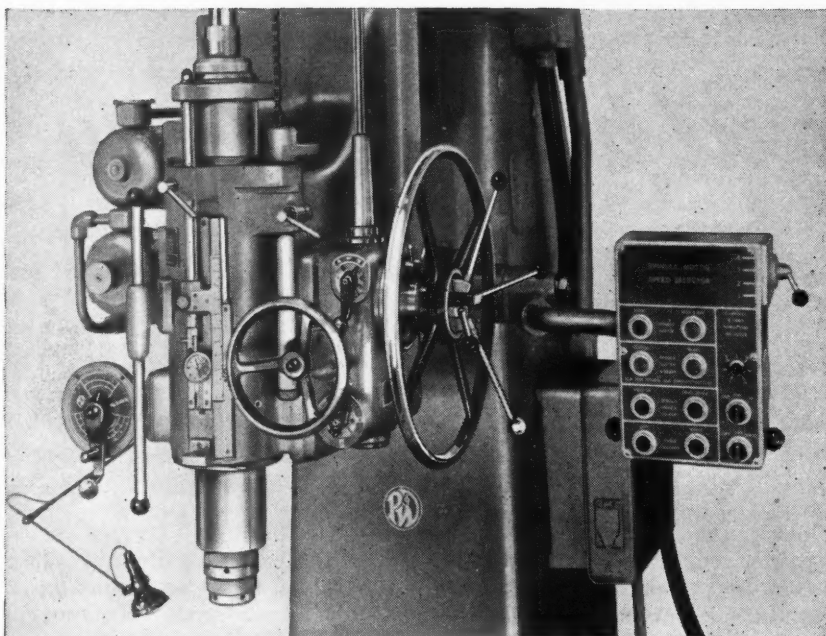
Close-up view of spindle and pendent control station of Pratt & Whitney jig boring machine shown in Fig. 1
